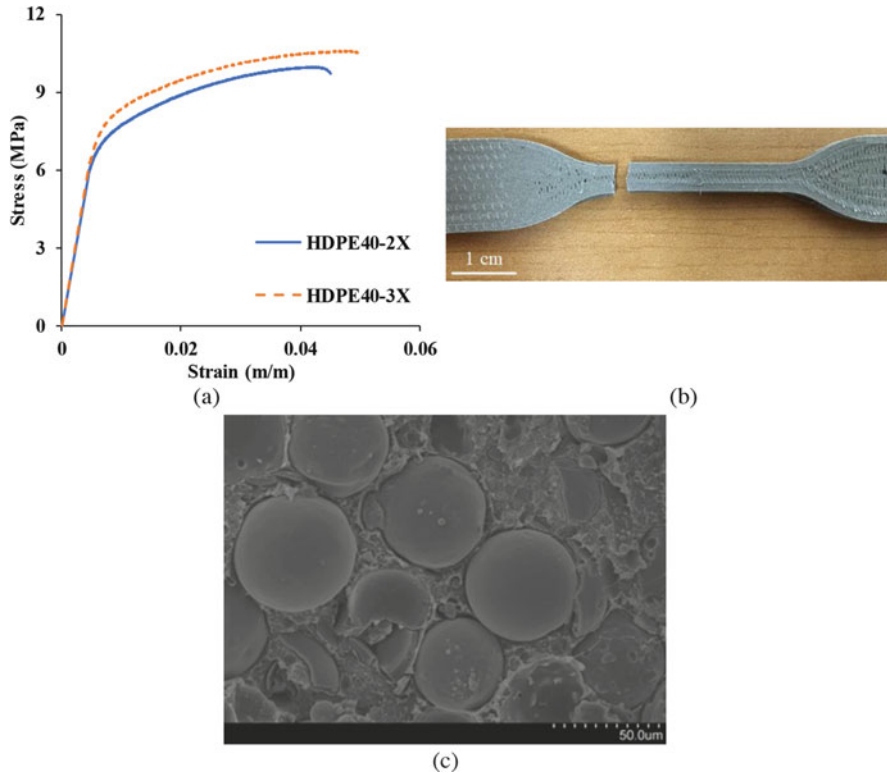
(a) Representative stress-strain plots for 3D printed HDPE40-2X and HDPE40-3X tensile specimens, (b) failure mode in HDPE40-2X specimen and (c) intact cenospheres on the fracture surface of a tensile tested HDPE40-3X specimen
